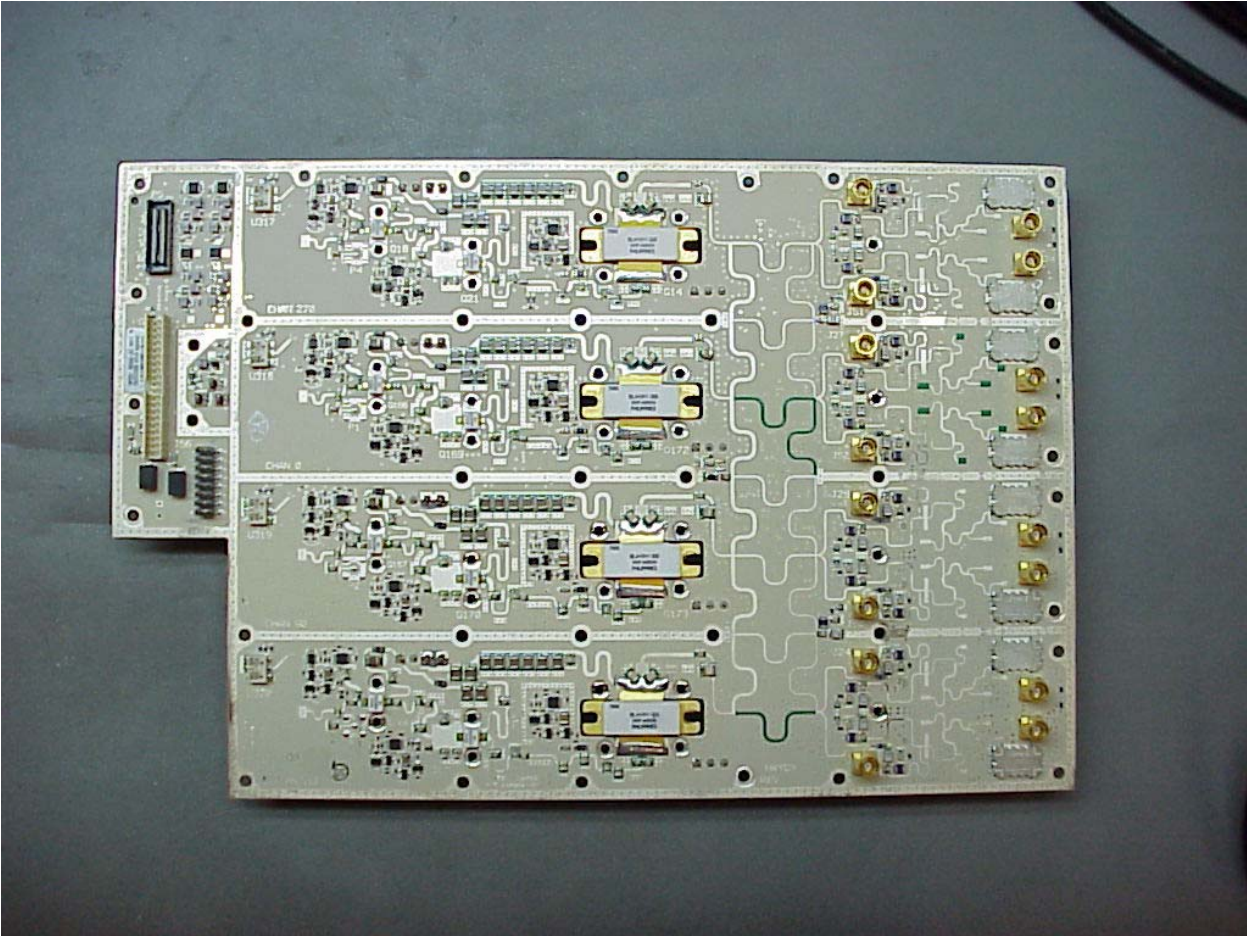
Front Side View of A4 Transmitter Assembly, Cover Removed
